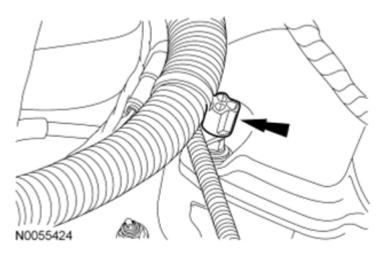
Locating Wiring Harness Retainer Courtesy of FORD MOTOR CO.
